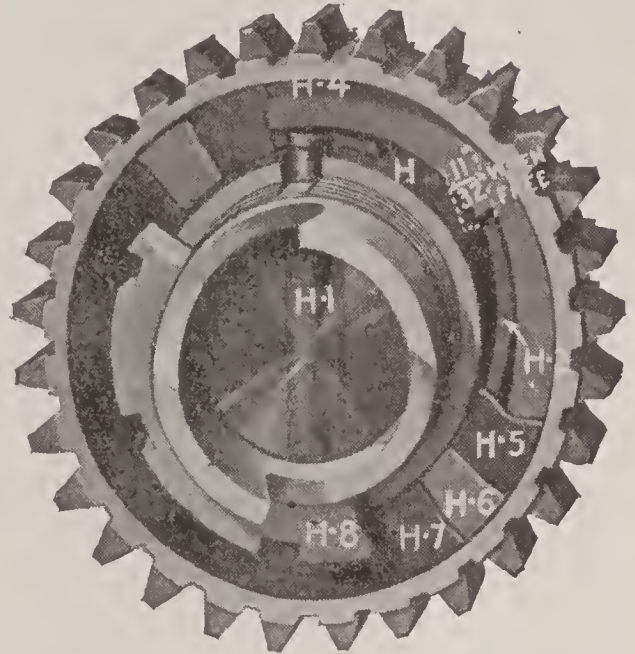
Assembly of Westinghouse Crankshaft Sprocket
